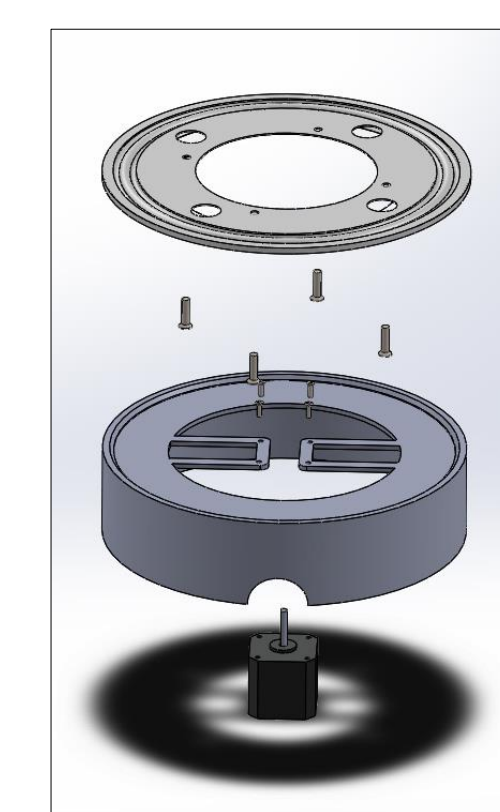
Exploded Assembly of Turntable, Tray, Azimuth Servo-Motor
